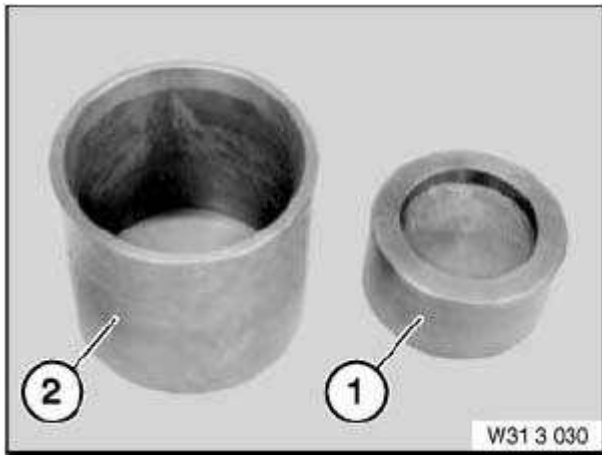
Press-In And Press-Out Tool (31 3 030)
